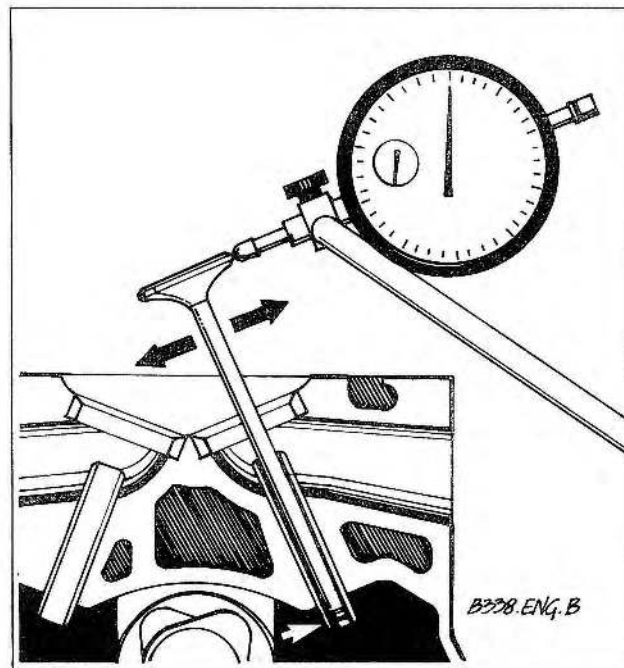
Valve guide wear being checked with dial indicator. Insert new valve until stem end is flush with end of guide (white arrow). Play should not exceed 0.8 mm (0.031 in.).
